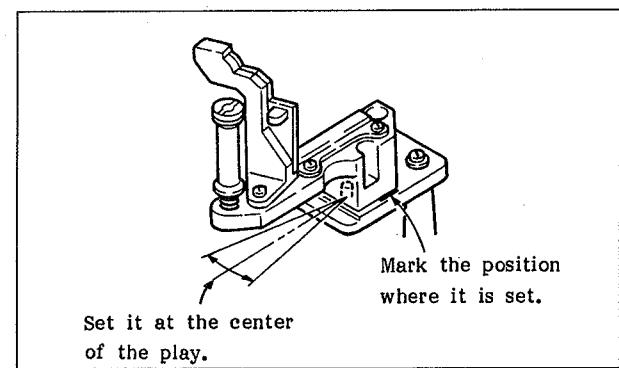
Adjustment of the Position of the T Guide Base Assembly
